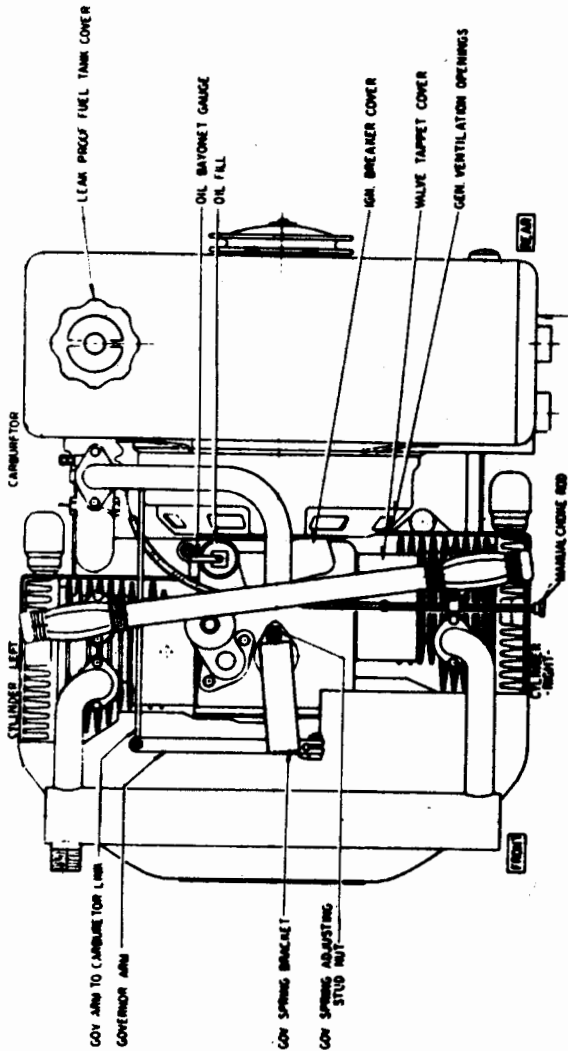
Valve and Cylinder Service Drawing for Engine Generator Set Type CDO-73004
